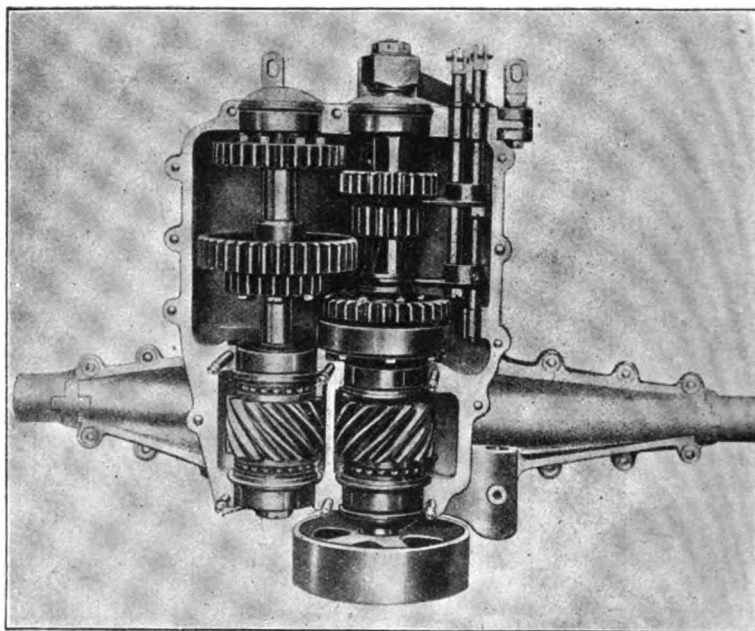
Sectional View of new Daimler Change-Speed Gear, showing double worm drive to differential shaft.
